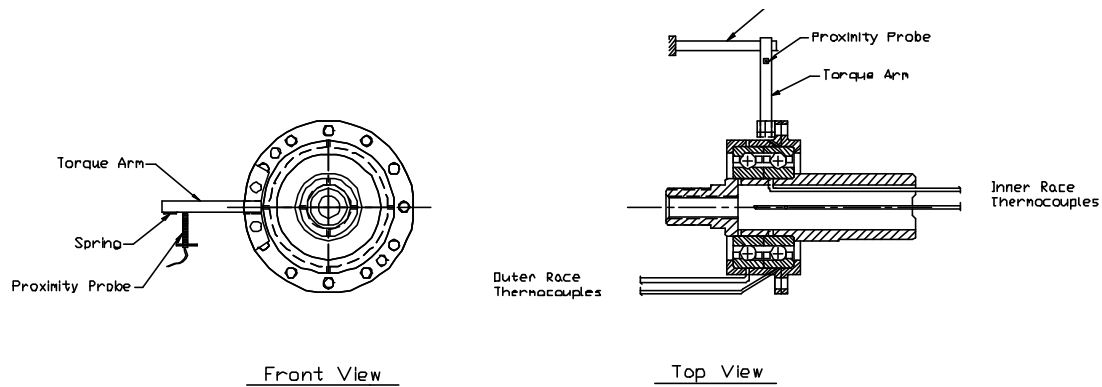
Schematic of Test Bearing Support, Torque Measuring Instrumentation, and Test Shaft
